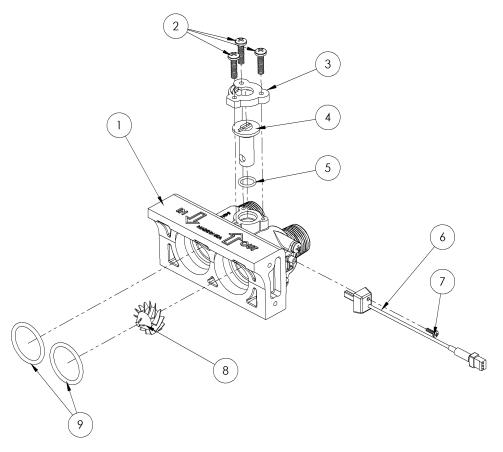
3/4" I/O Adapter Assembly with Blending Valve
